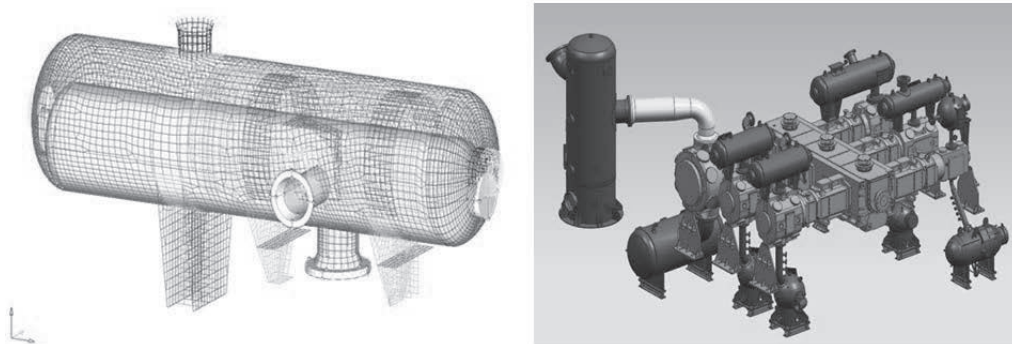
Selection of damper shape and CAD of model Booster-Primary GA
